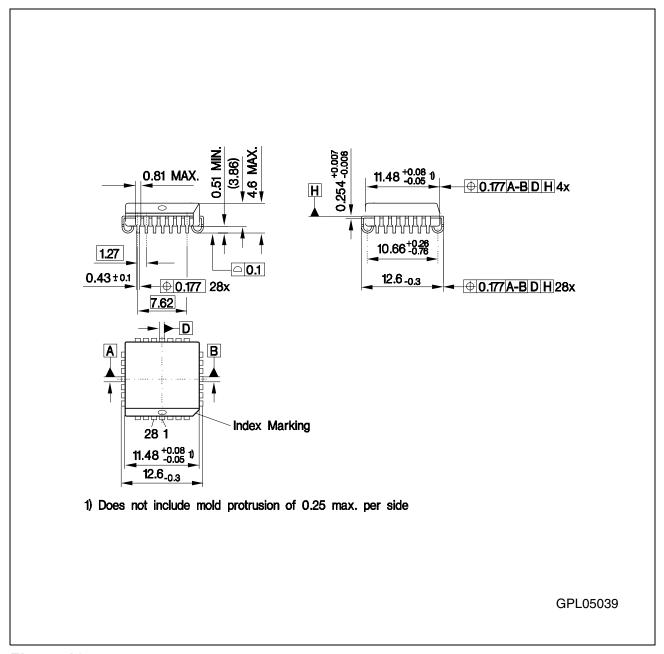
P-LCC-28-2 (Plastic Leaded Chip Carrier Package)
